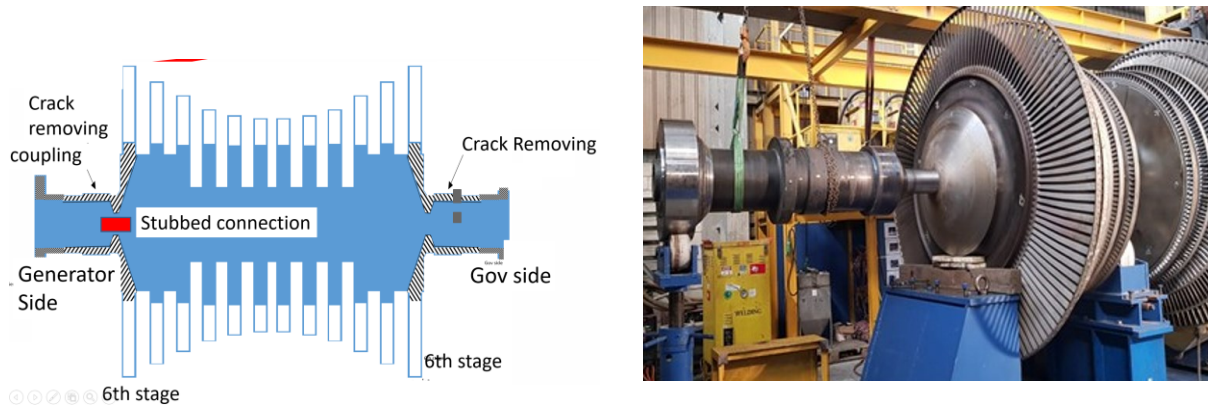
Rotor crack both at end side of 6<sup>th</sup> blades, both in generator side and governor side. Right picture is generator side after stubbing.
